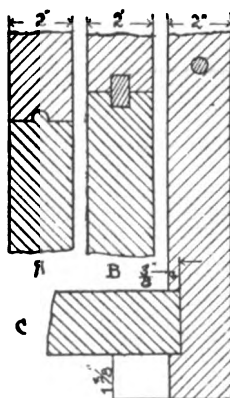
Joint construction in wooden cooling tank. a and b tongue and groove; c rabbeted corner.
